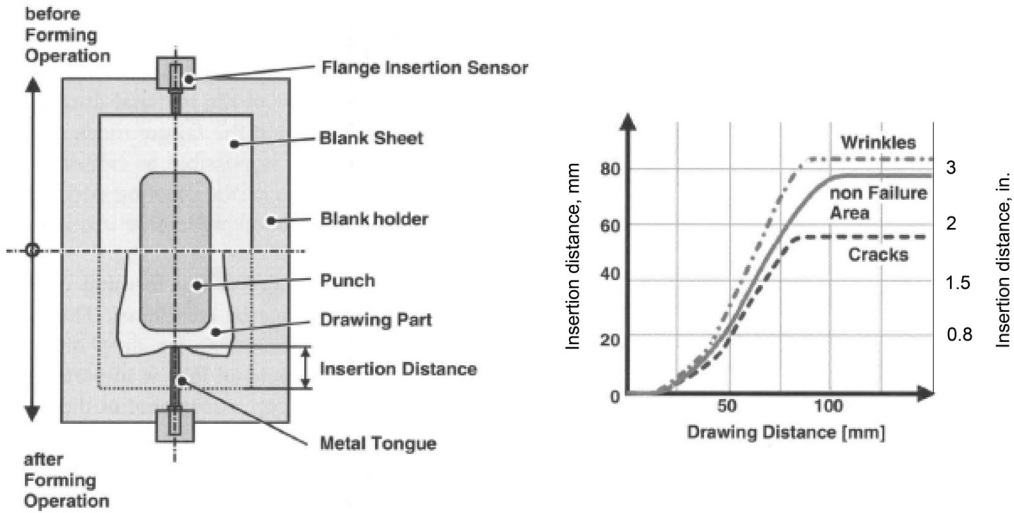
Flange insertion or draw-in sensor to measure draw-in in deep drawing tool. Source: Ref 15.2
